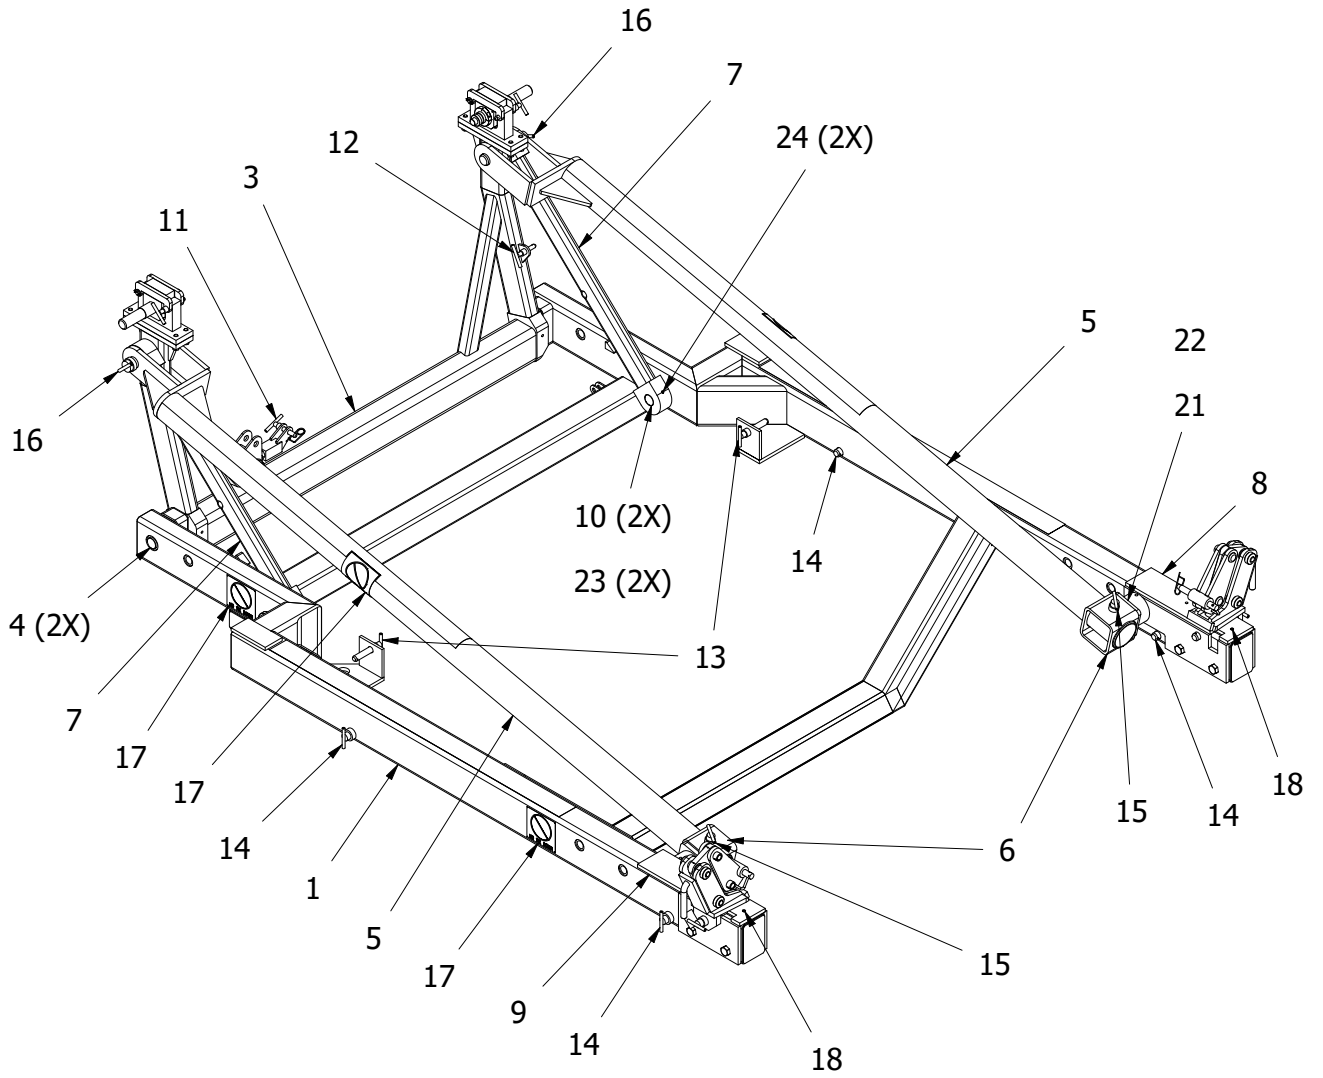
AM-1928-156-80C2 Cradle Assembly w/o Bootstrap Adapter for CF6-80C2
